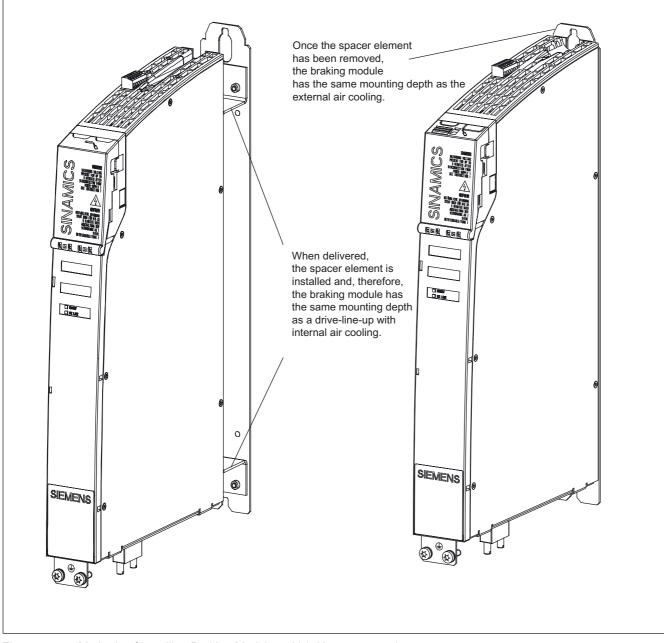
Methods of installing Braking Modules with/without spacer elements
